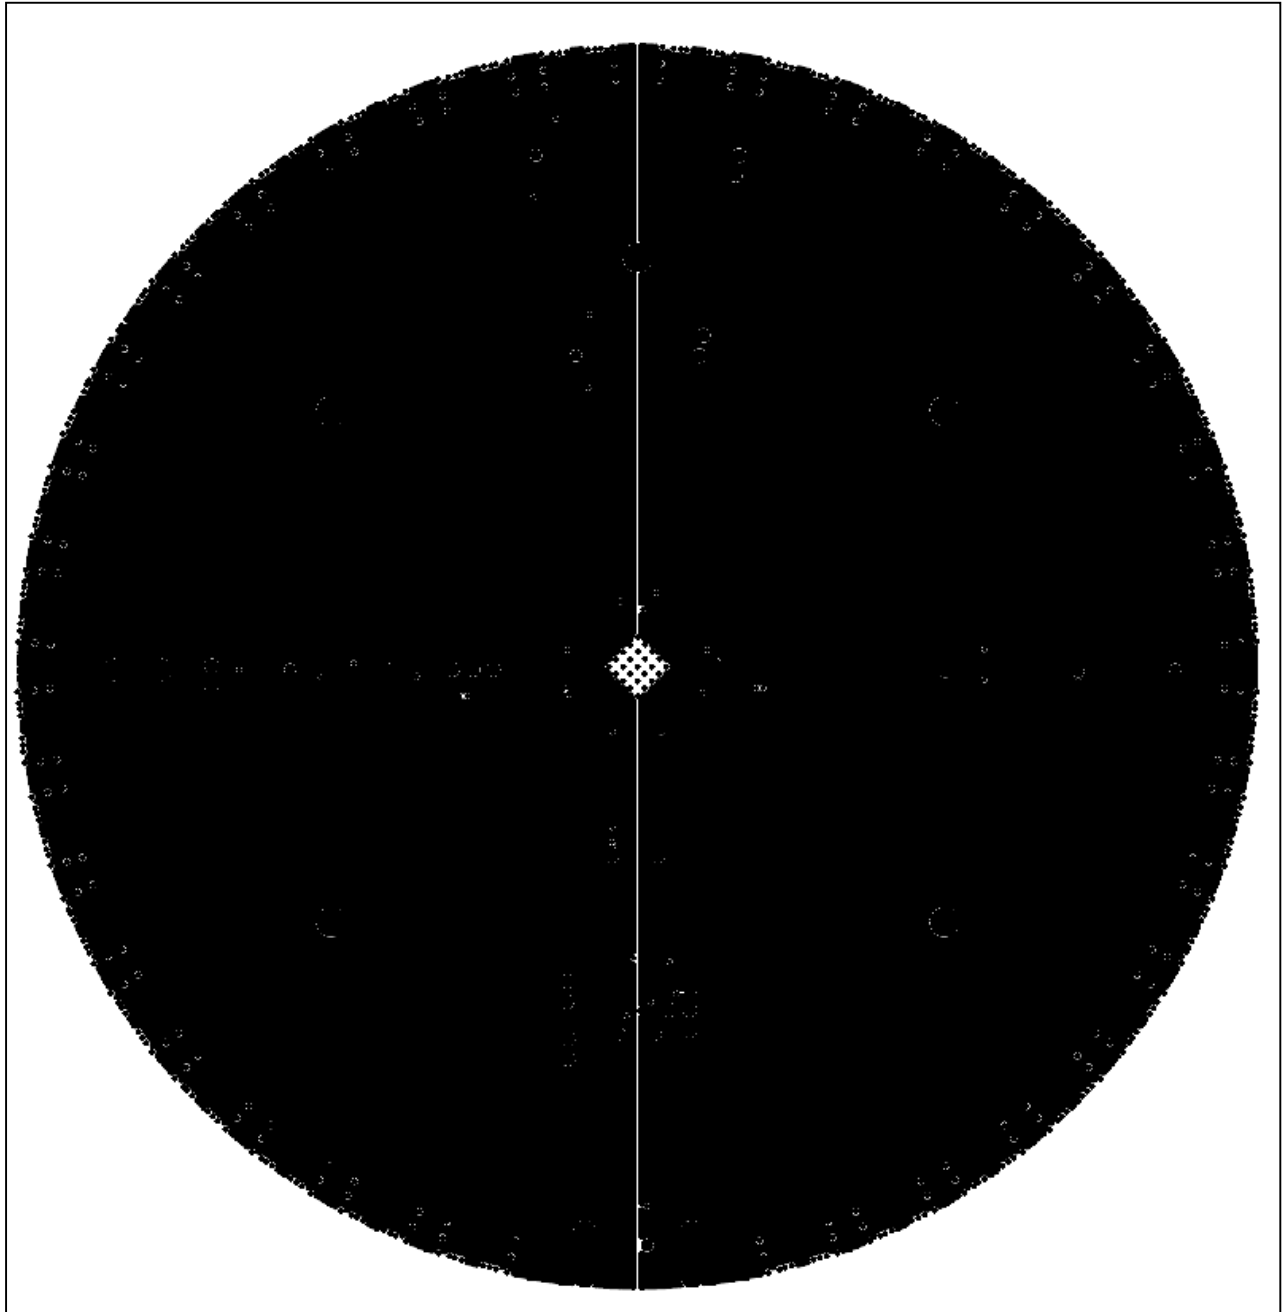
MAX3983 SMA Connector EV Kit PC Board Layout – Power Plane
